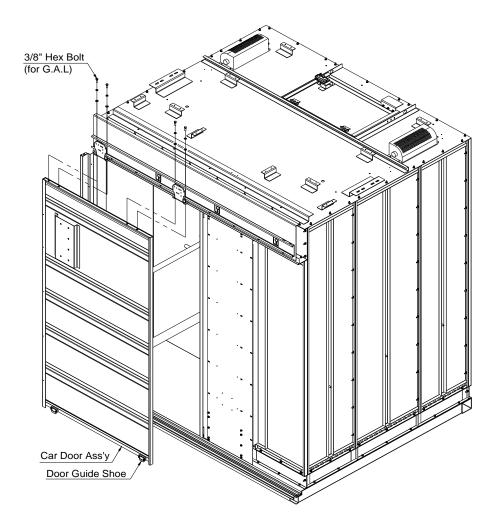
B. INSTALLATION OF CAR DOOR
